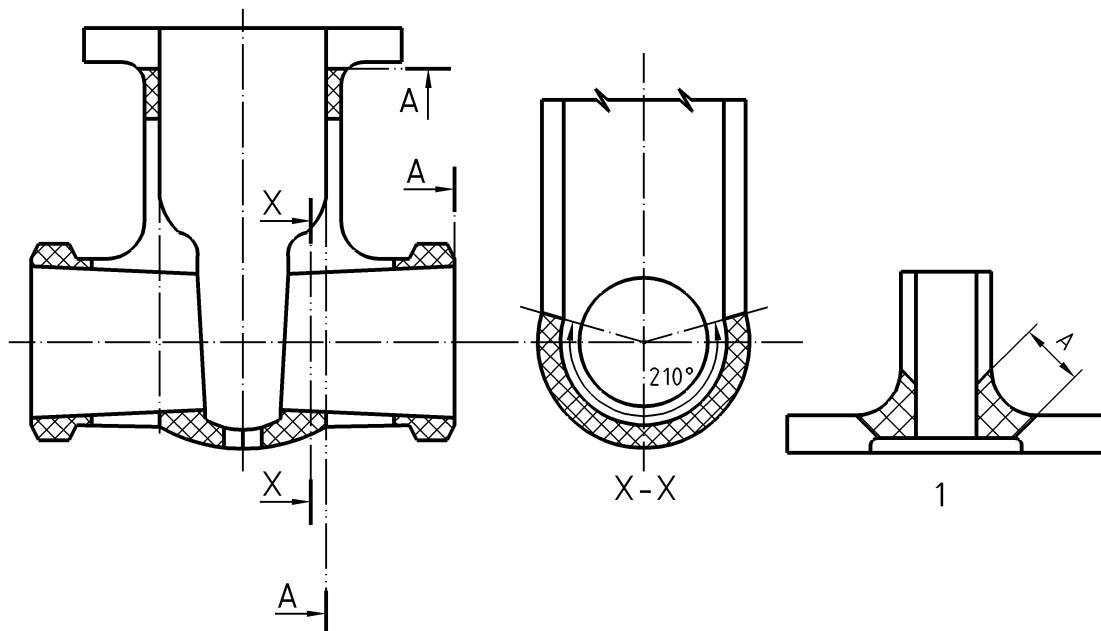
Typical casting section showing required radiographic examination of gate valve body and bonnet (flanged bonnet)
